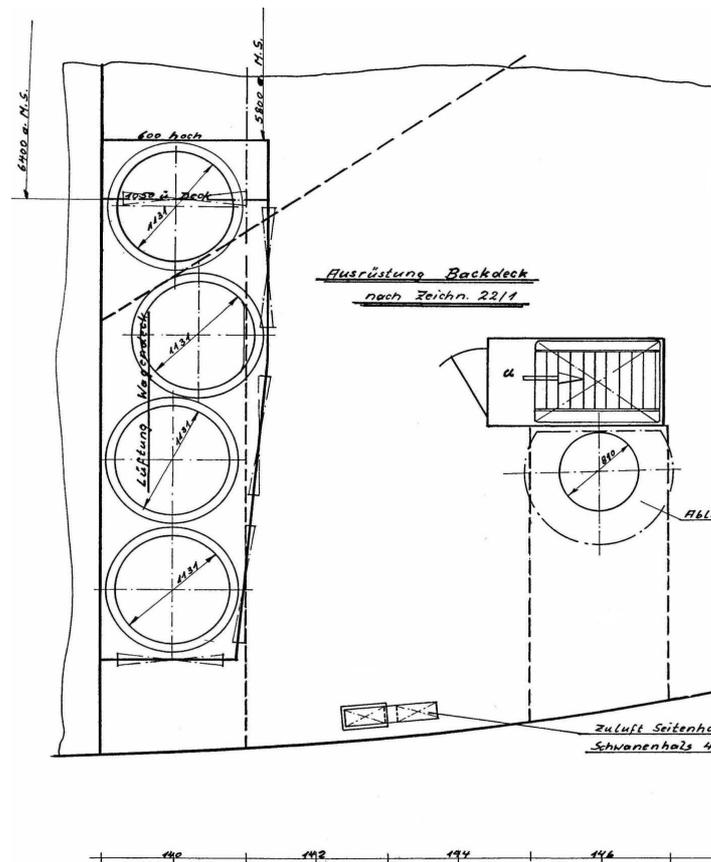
For-ward Wing House, starboard side, top view, Drawing S590 – 24/3
